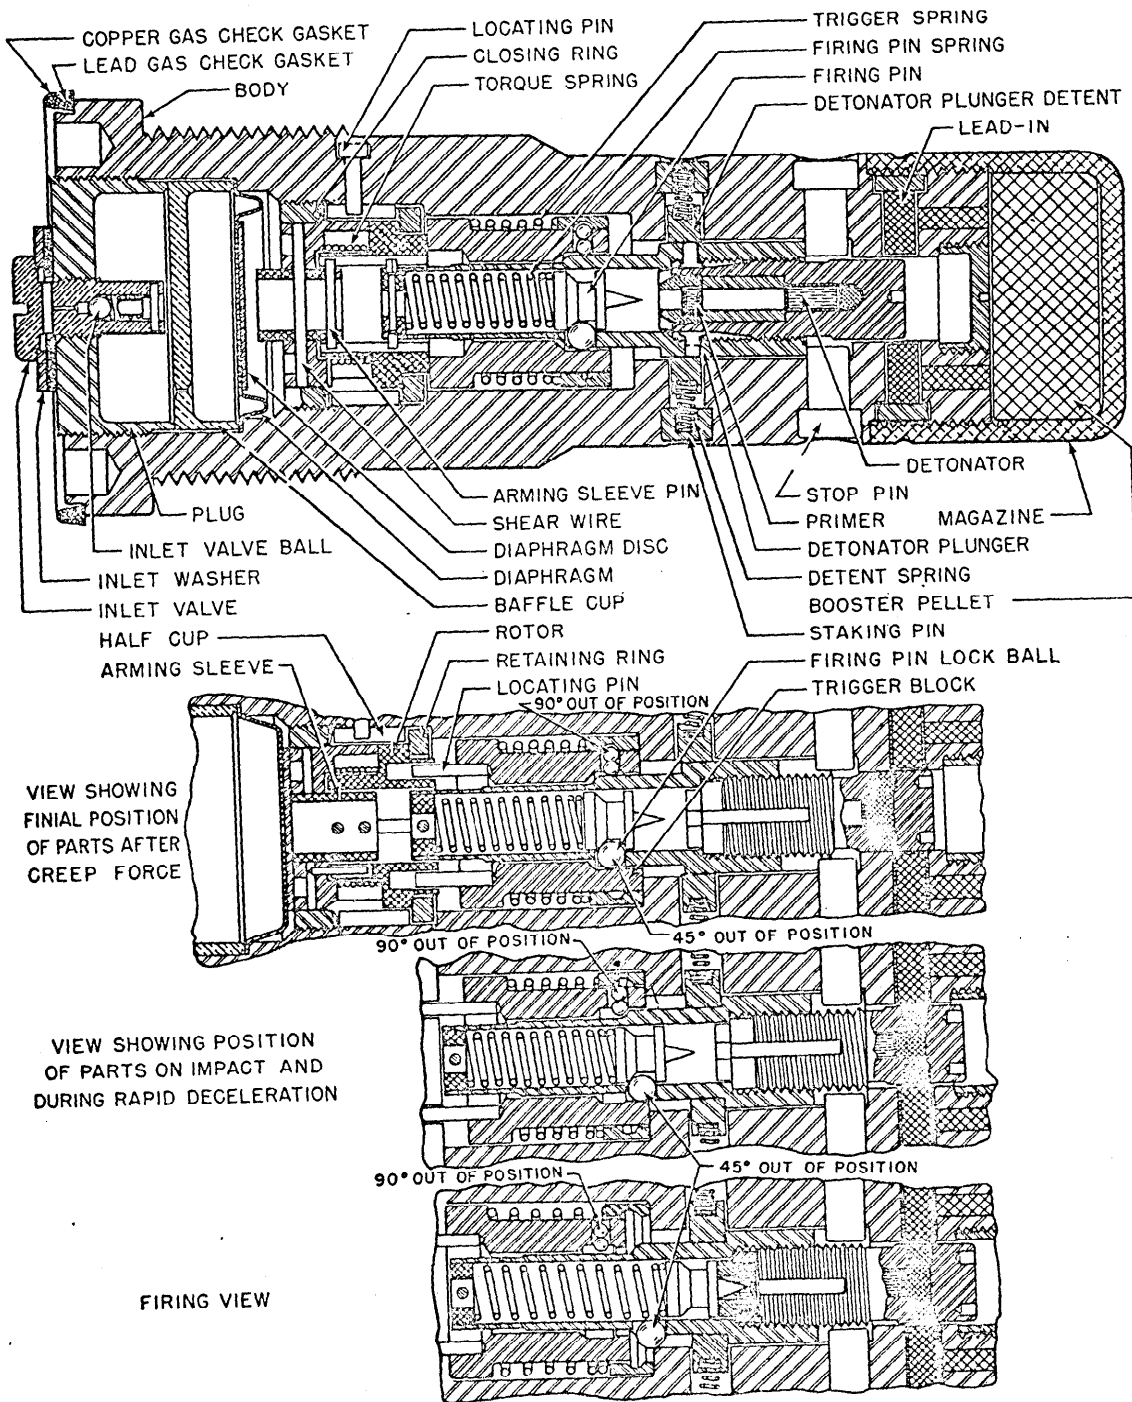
Base Fuze Mk 166 Mod 0, Cross Section View Showing Unarmed Position, Position of Parts after Creep, Position of Parts after Rapid Deceleration and Firing.
